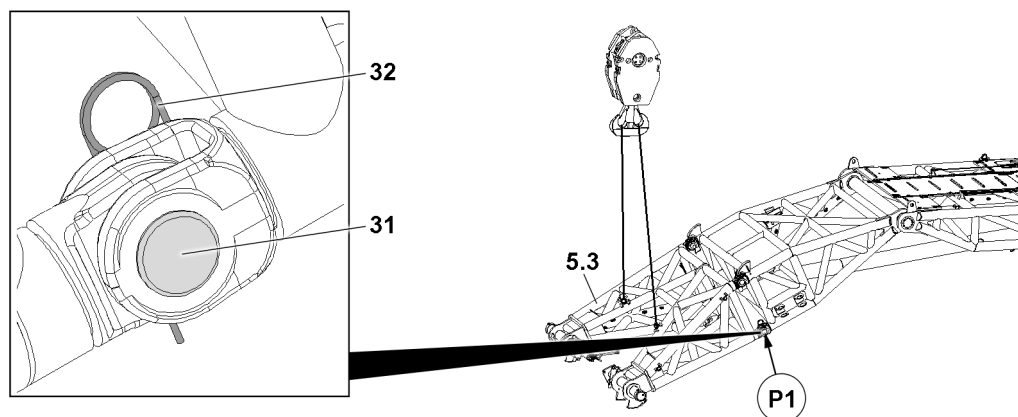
Disassembling the end section – Unpinning the end section at the bottom
